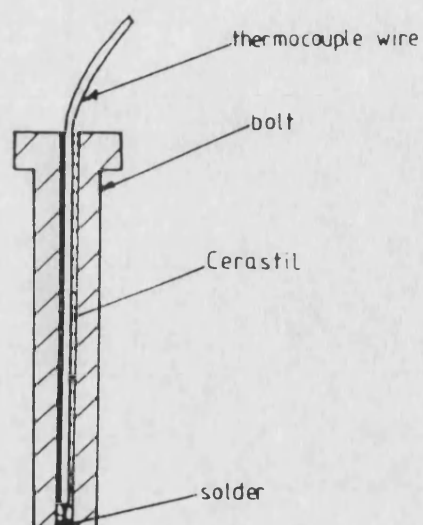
THERMOCOUPLED BOLT FOR HEAD TEMPERATURE MEASUREMENT
